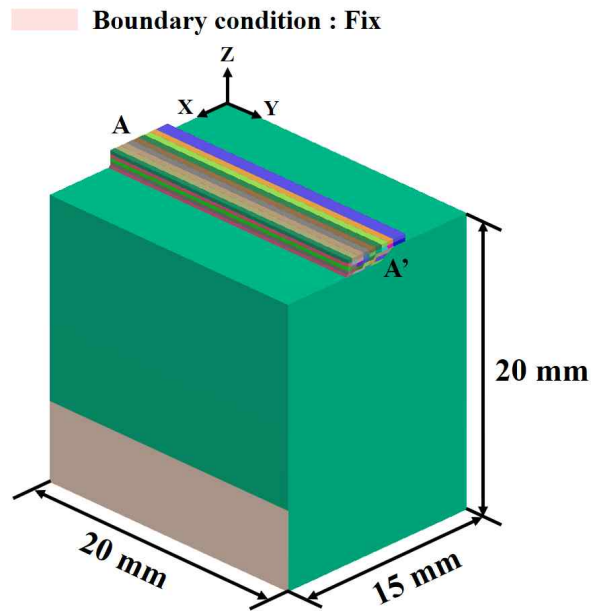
FE models for thermo-mechanical analysis of deposition shape
